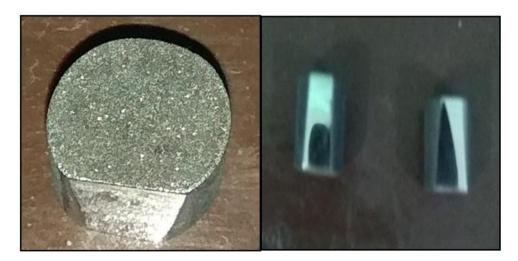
(a) Top surface image of c-BN diffused layer; (b) Side view of c-BN diffused layer
